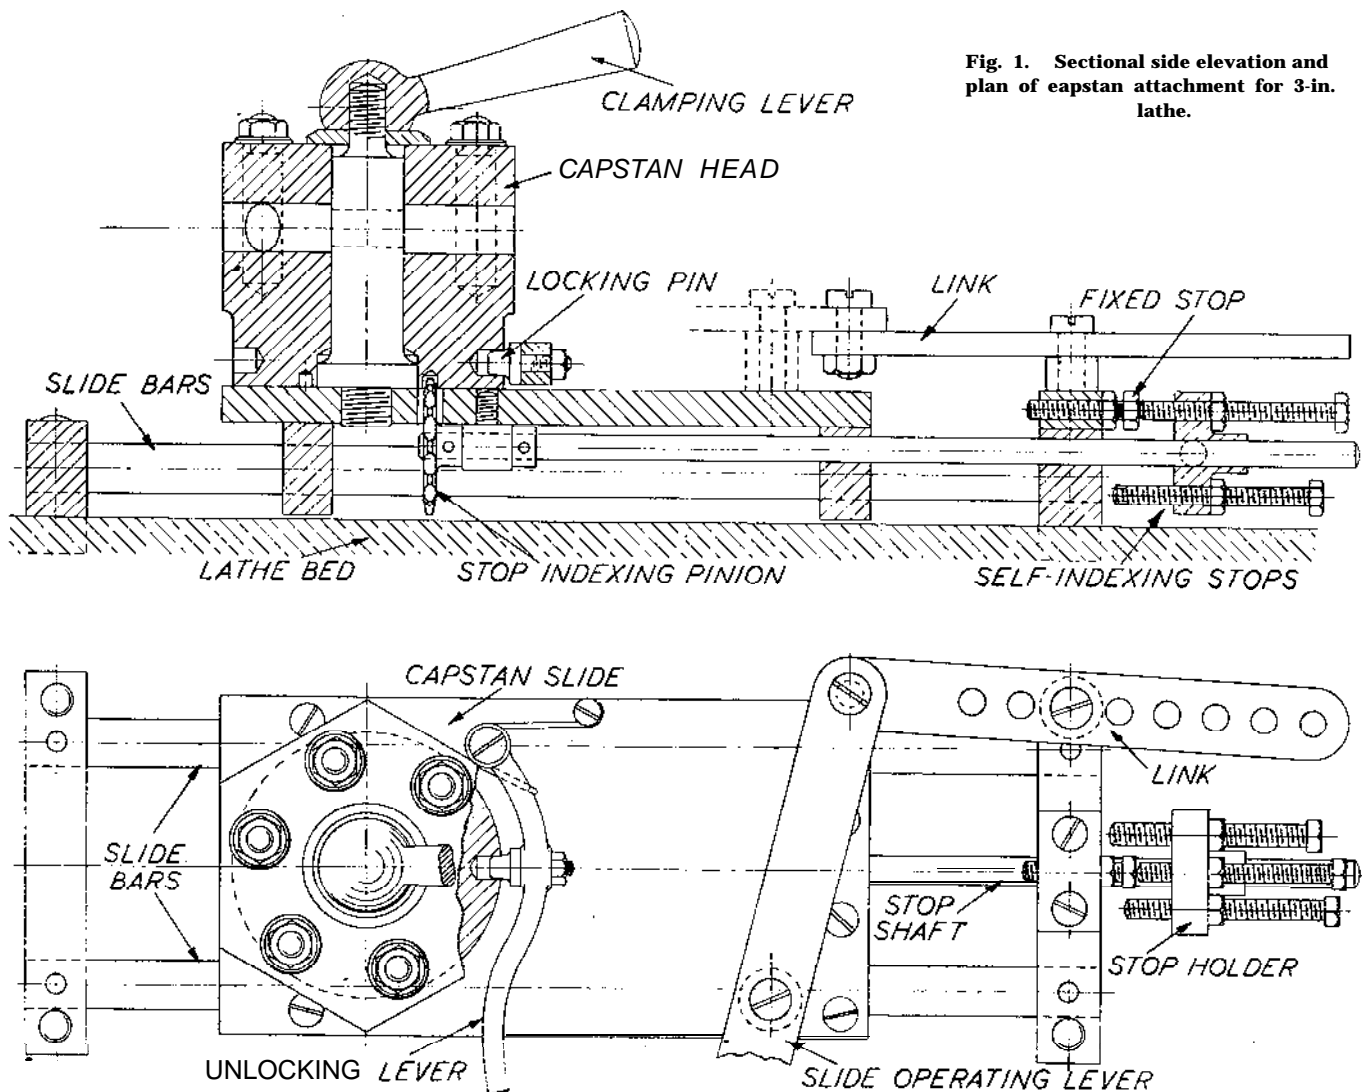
Sectional side elevation and plan of capstan attachment for 3-in. lathe.
